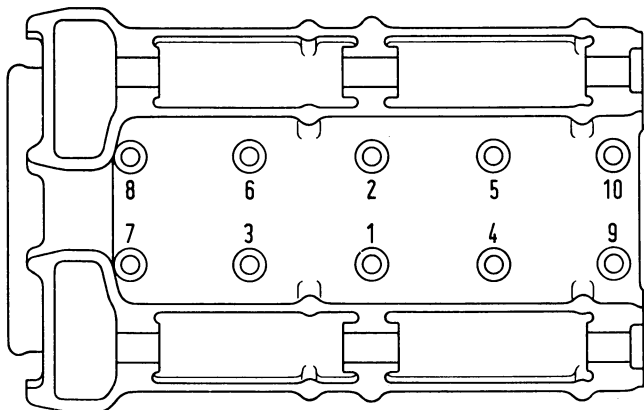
118 B.000 engine head hold-down screw tightening sequence.
